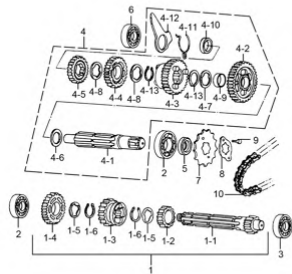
GEAR SHIFTING (X01-S160-0010)
